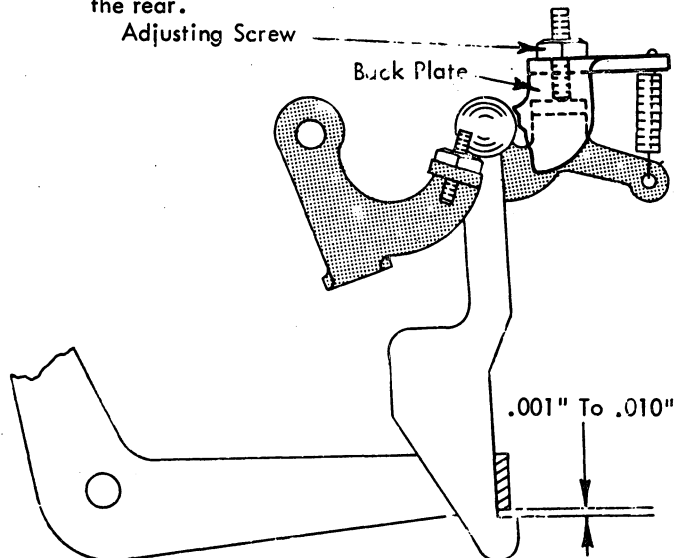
Carrier Return Latch Height Adjustment (11 Inch Machine)
